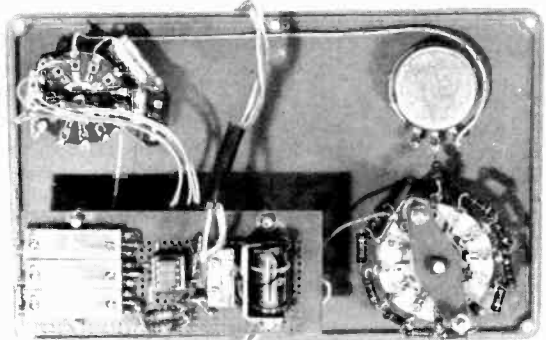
The front panel layout with switch wiring detached for clarity. The top and bottom views of the circuit board showing disposition of components and interwiring is shown on the left
